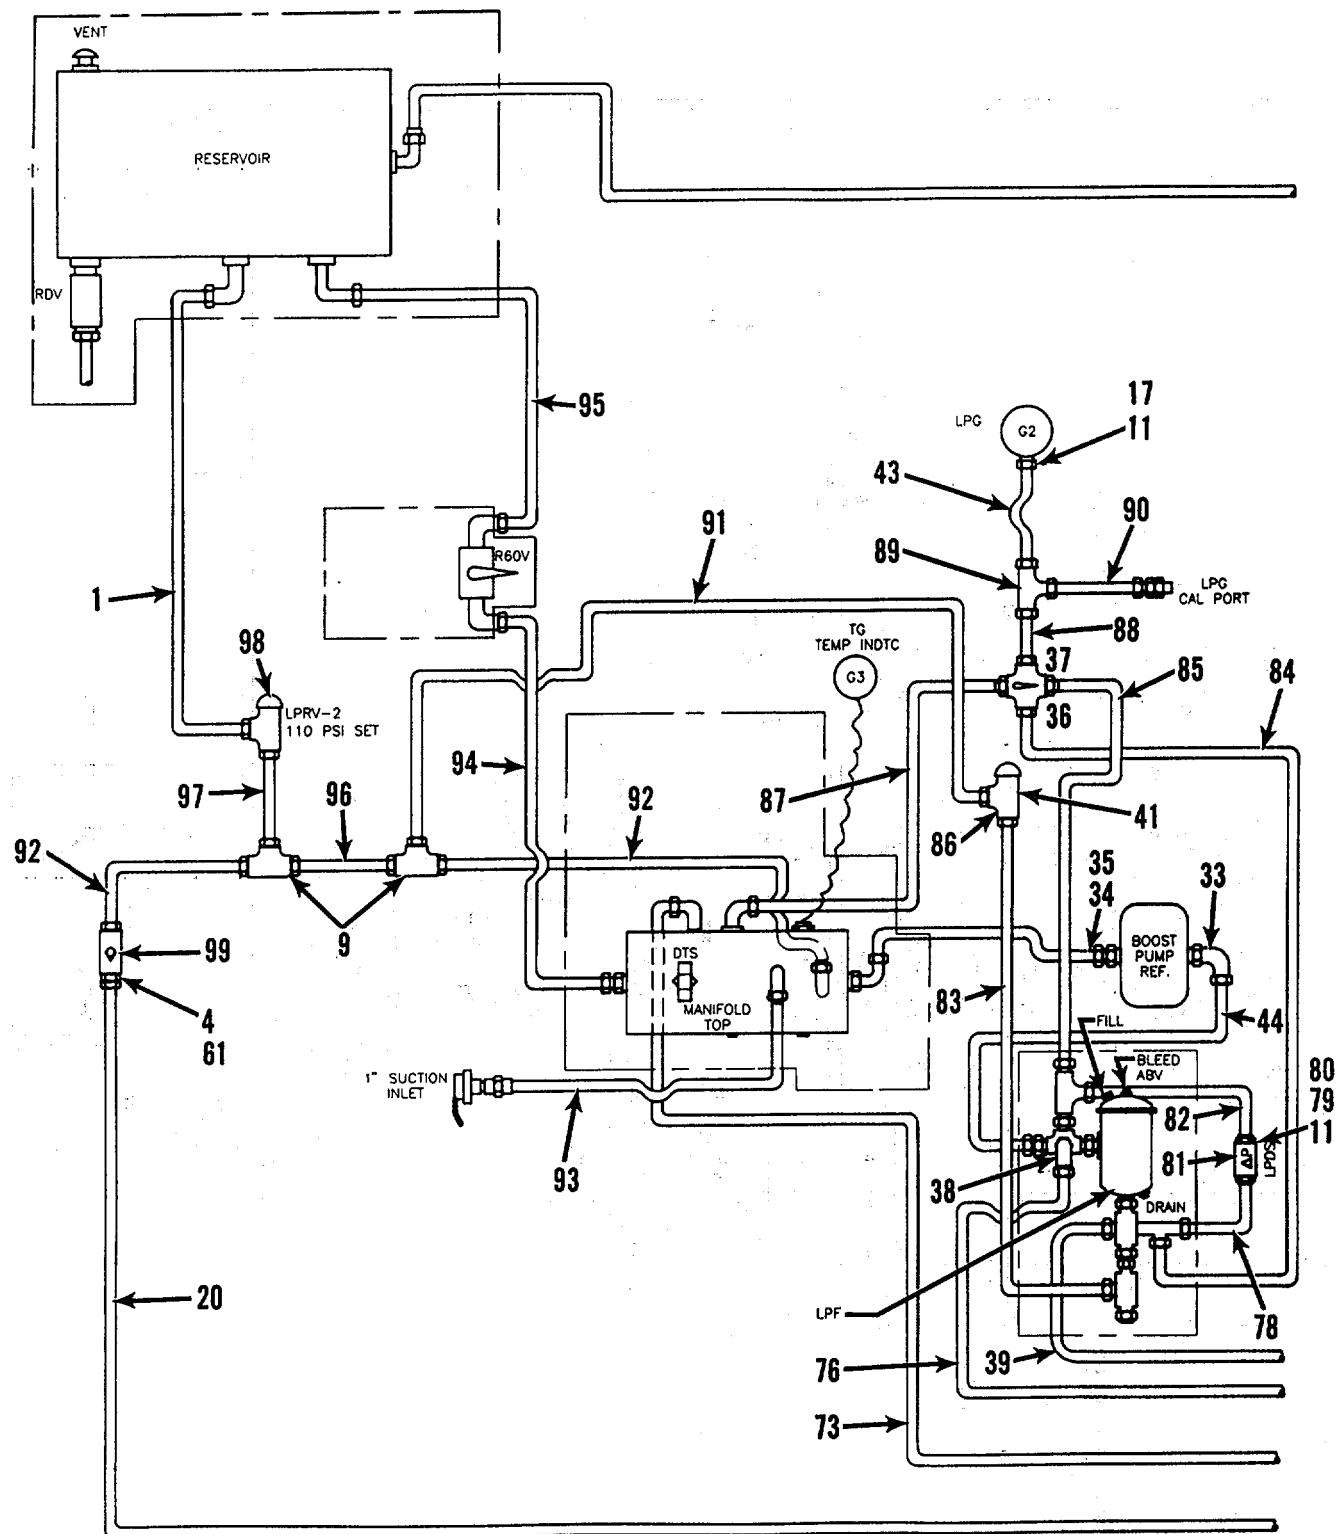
Hydraulic Piping Installation, D-6A (Sheet 1 of 2)
